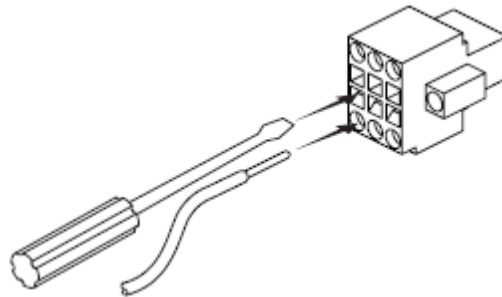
Wires connection making to the spring terminals of DAQ card
